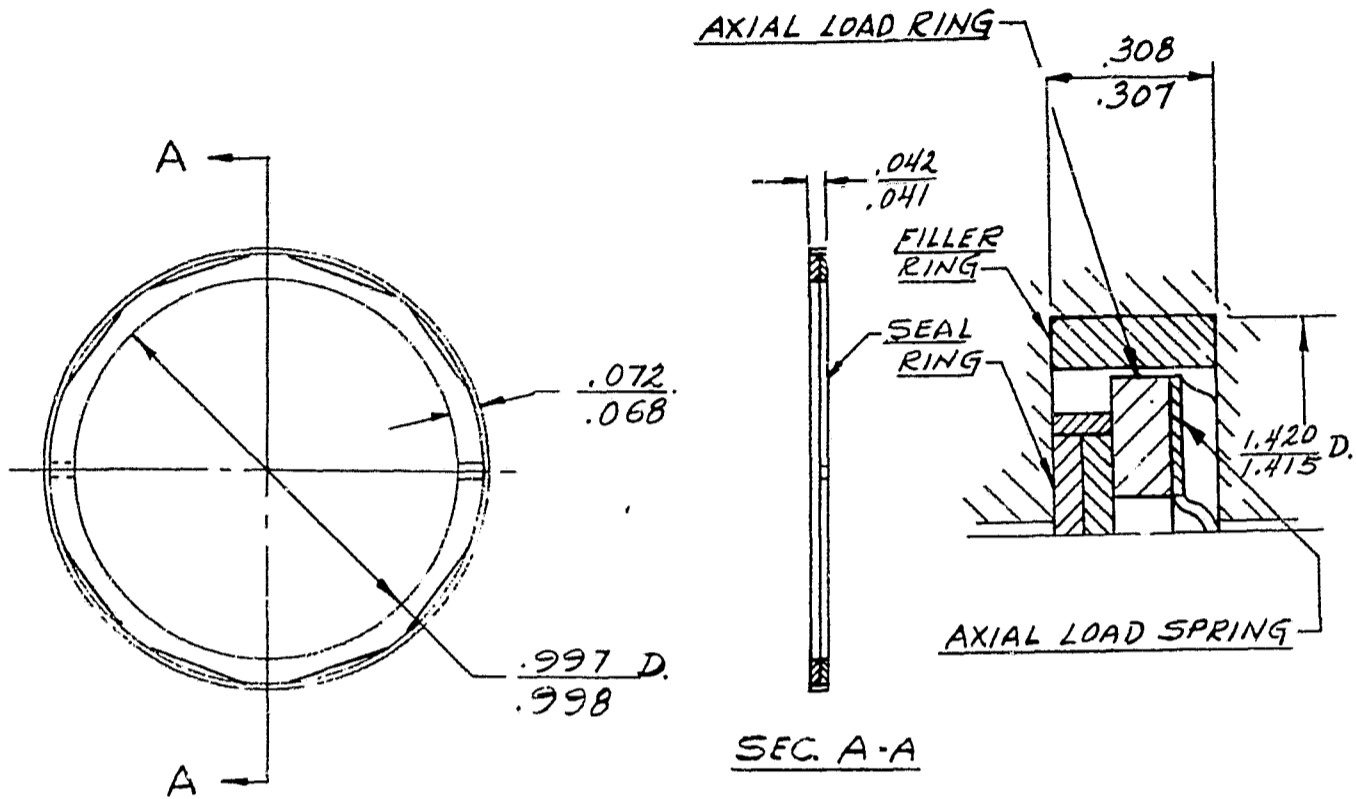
Cook Seal, Type MX-1 (Type 440C)
